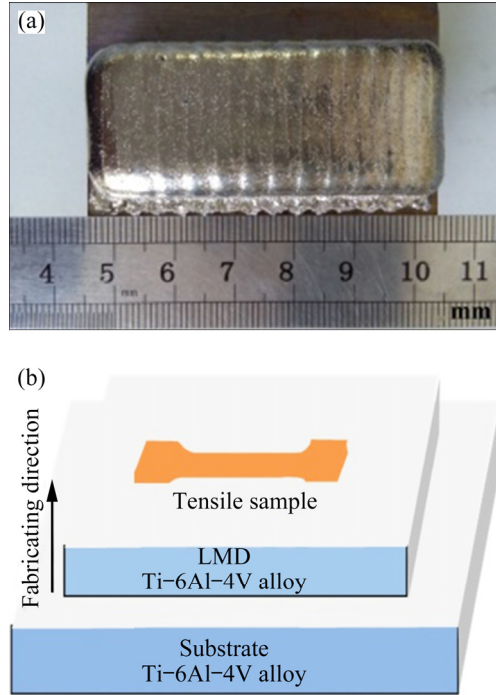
As-fabricated LMD block (a) and schematic diagram of tensile specimens extracted from component (b)
